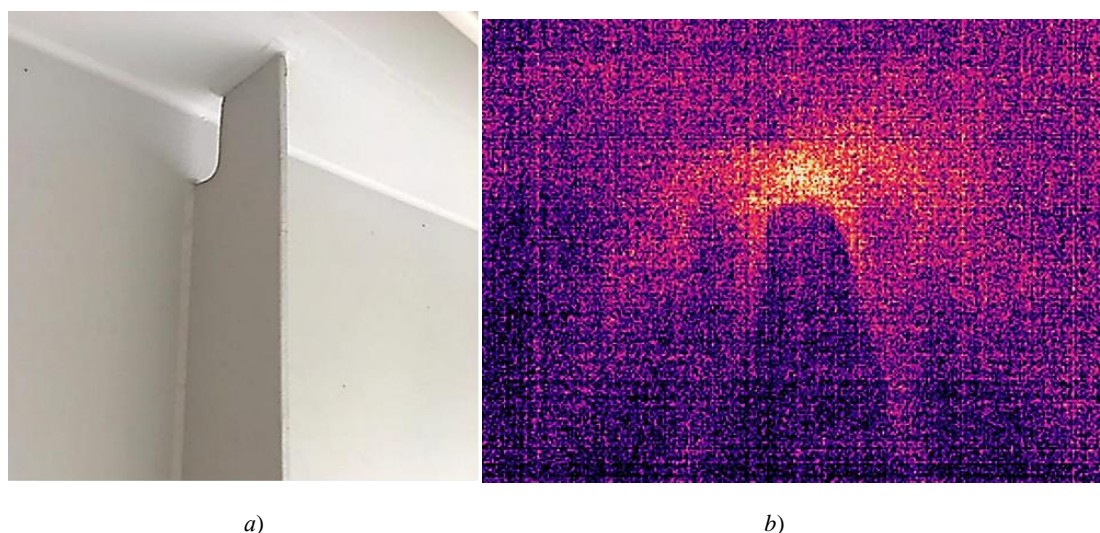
Infrared results: *a* — weld seam without visible fatigue damage; *b* — image of the weld toe, built from the values of matrix *B
